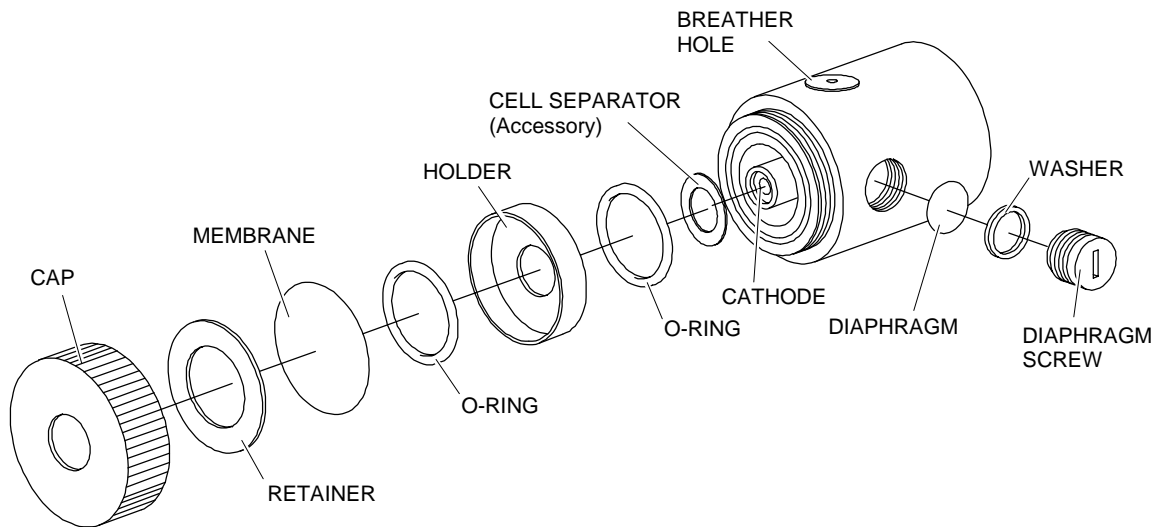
RECHARGEABLE SENSOR - EXPLODED VIEW
